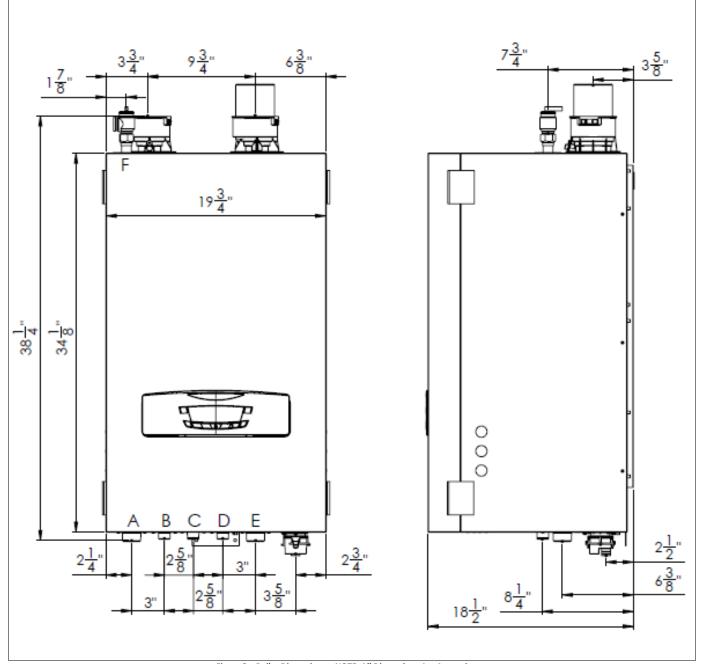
Boiler Dimensions – NOTE: All Dimensions Are Approximate
